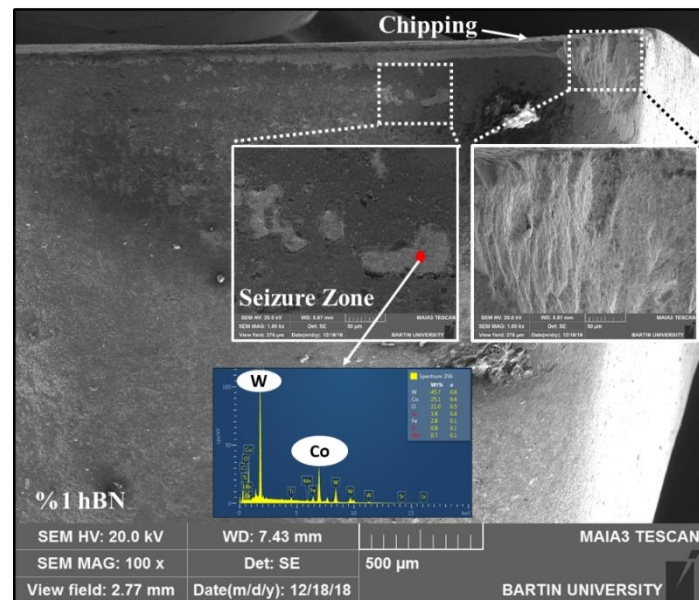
SEM image of worn cutting tool using %1 h-BN added cutting fluid
